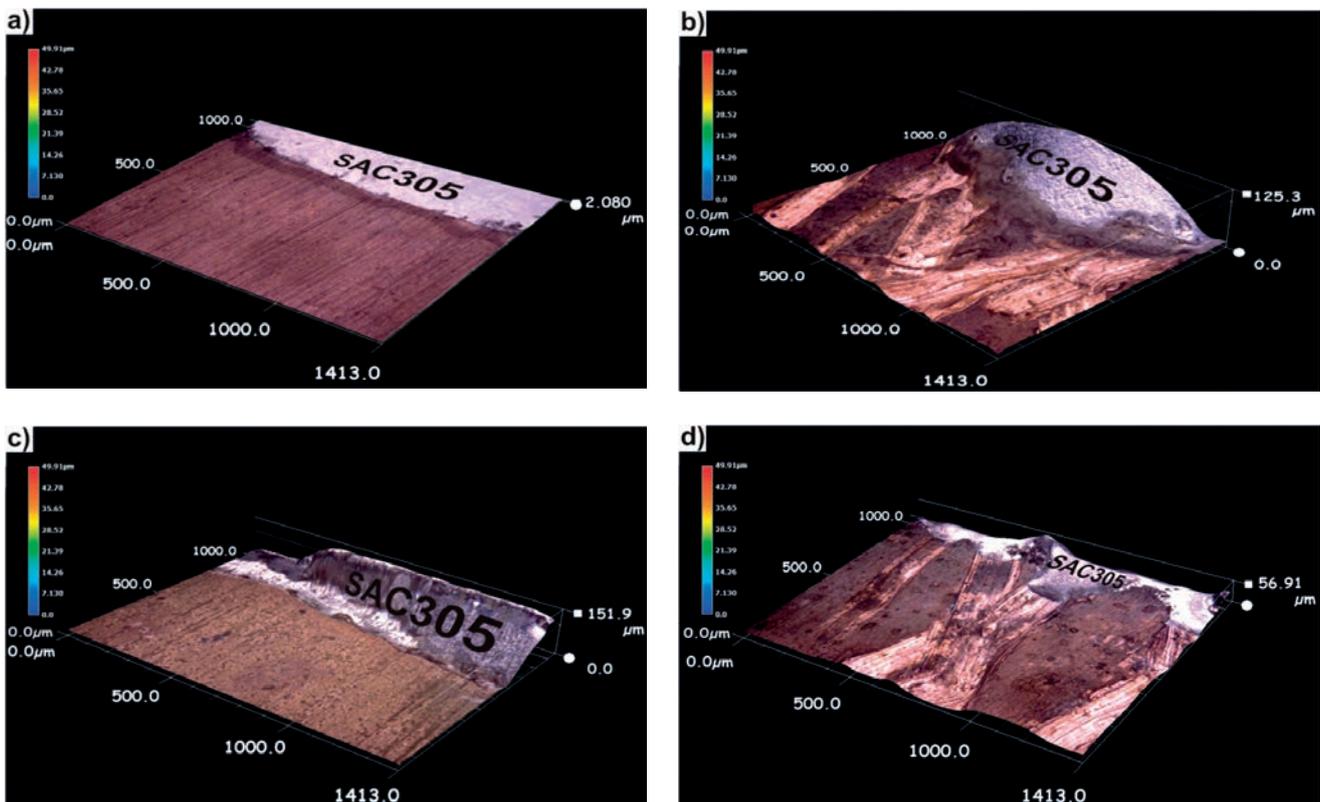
3D optical microscopy top view of PCBs after solderability tests with SAC305: a) in delivery state (reference), b) after mechanical damage, c) oxidized in air (260°C, 1 h), d) after oxidation and mechanical damage
